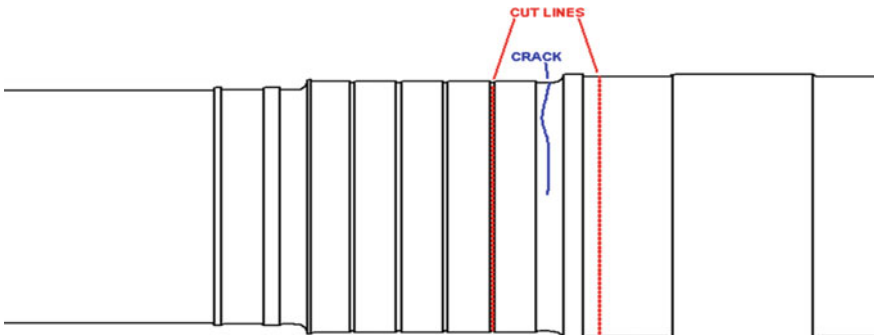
Cracked zone in the shaft is shown in red lines
